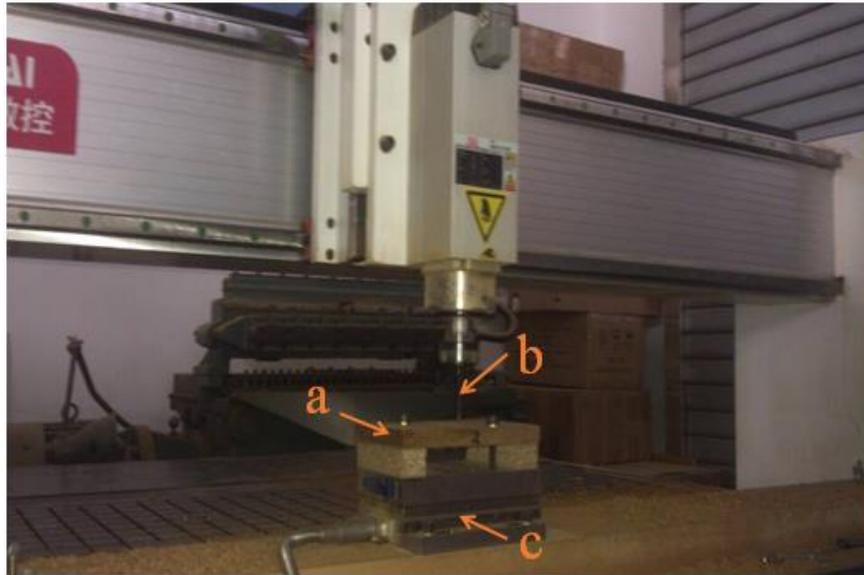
The equipment setup with the recombinant bamboo. (a) Recombinant bamboo, (b) drilling tool, and (c) dynamometer
